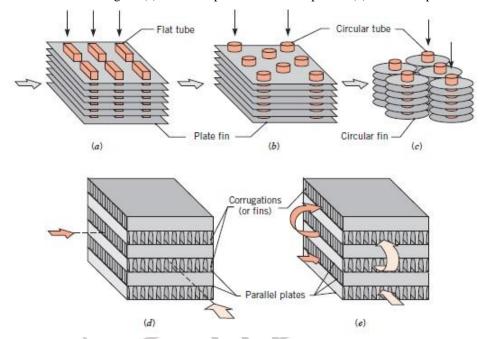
Compact heat exchanger cores. (a) Fin–tube (flat tubes, continuous plate fins). (b) Fin–tube (circular tubes, continuous plate fins). (c) Fin–tube (circular tubes, circular fins). (d) Plate–fin (single pass). (e) Plate–fin (multipass).).
